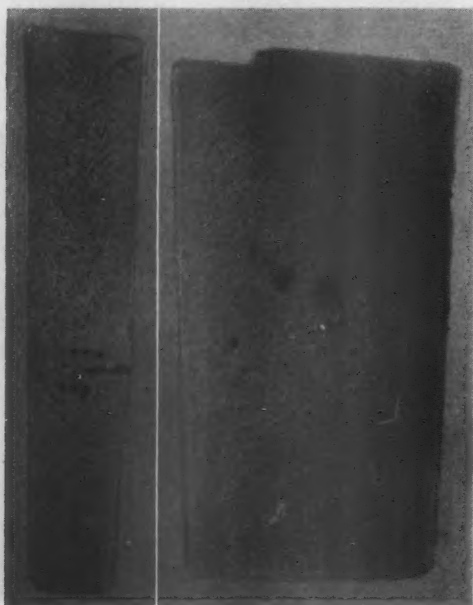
(A) COIL CHILL IN 1 IN. COUPON. (B) COIL CHILL IN 3 IN. COUPON.
